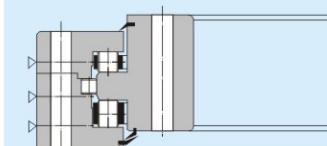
Three-row cylindrical roller combined bearing without gear
